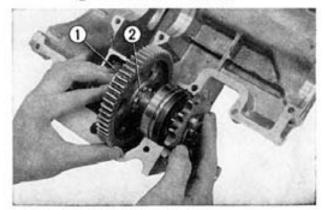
① Final shaft oil guide ② Final shaft assembly
